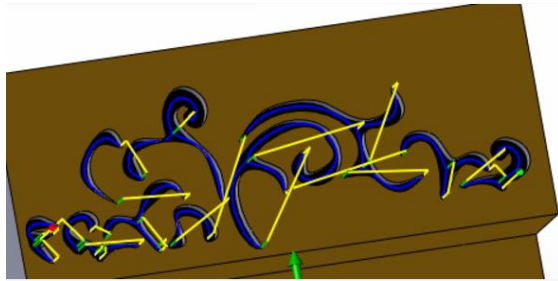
Adaptive machining (1cpro.cz)
